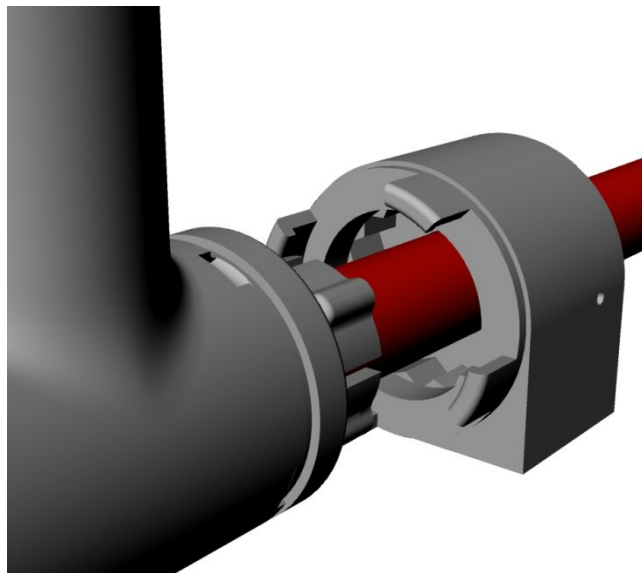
An exploded view of the spring board and wave wheel attached to the central axis
